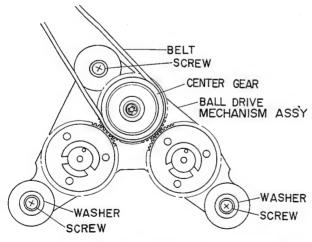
Ball Drive Mechanism Ass'y Replacement
